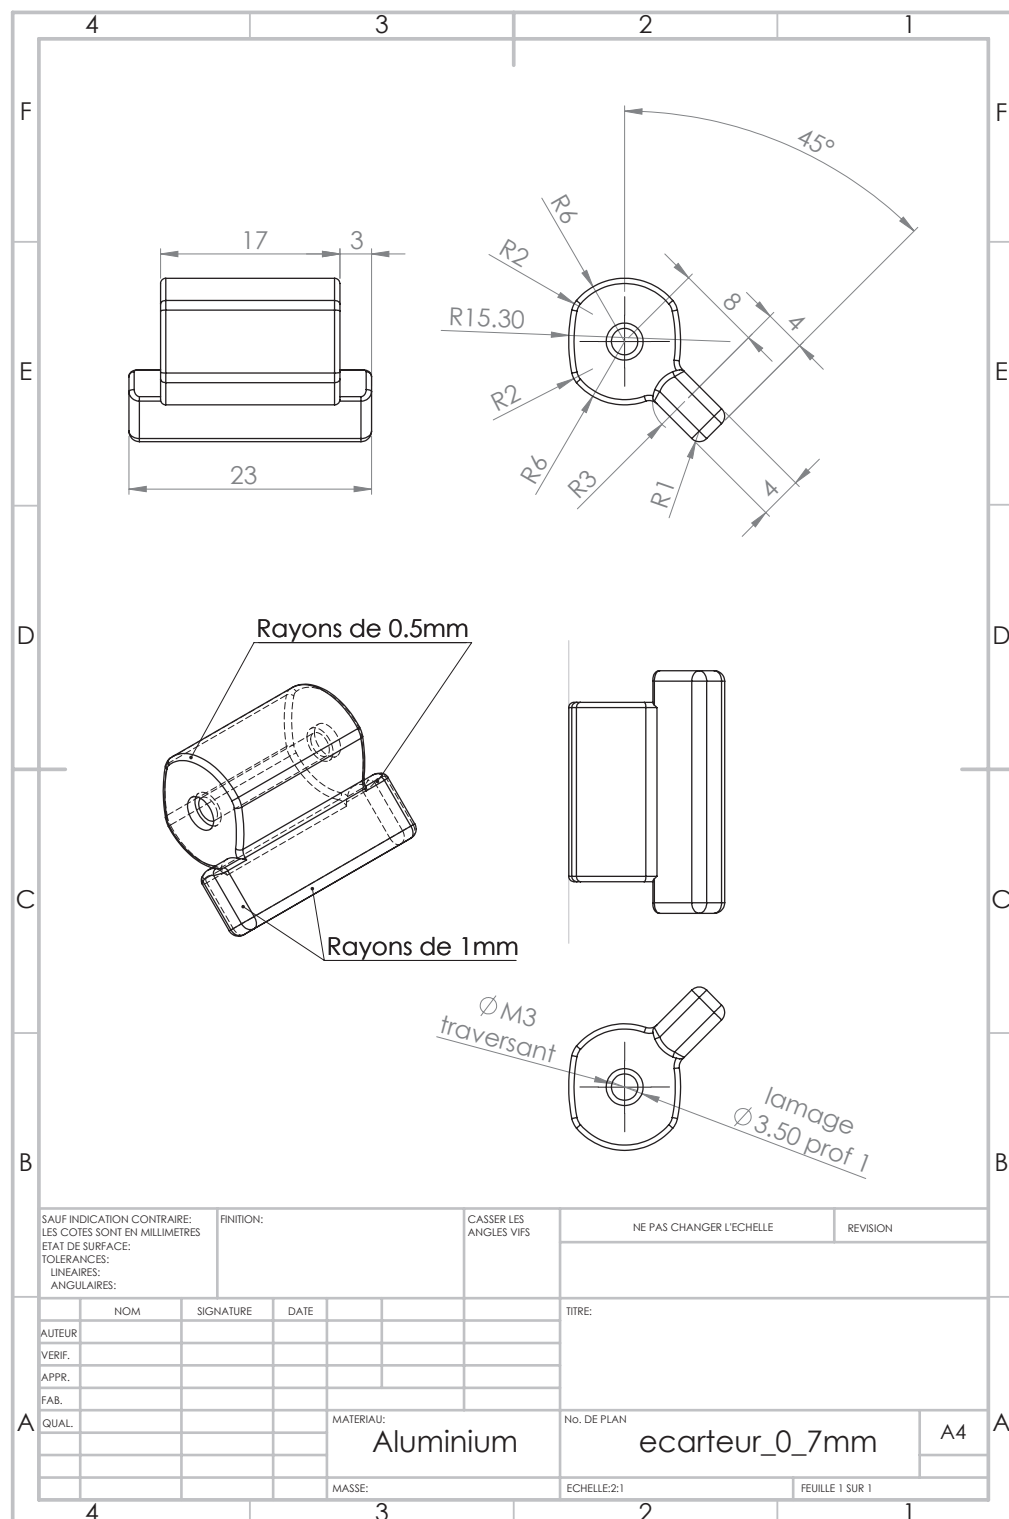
Dimensioned drawing of the lever of the calibrator. Provided by CTTM.
